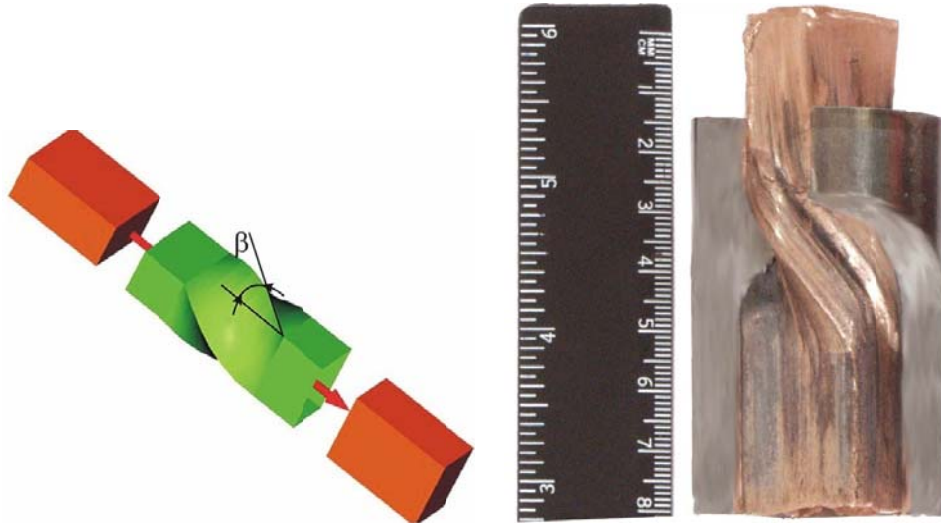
Twist extrusion process and photo of the workpiece during TE[8]
